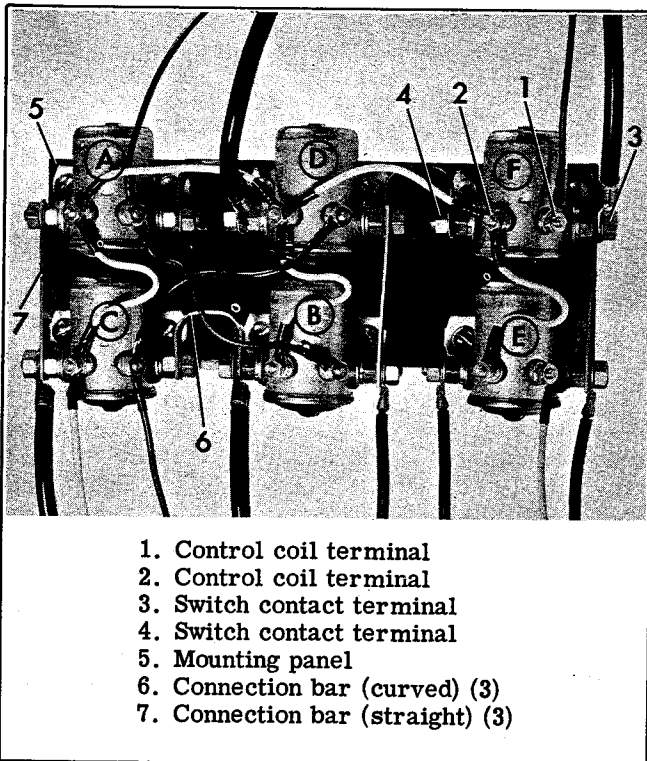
Solenoid Panel and Wiring Arrangement (1963-66 DE)
